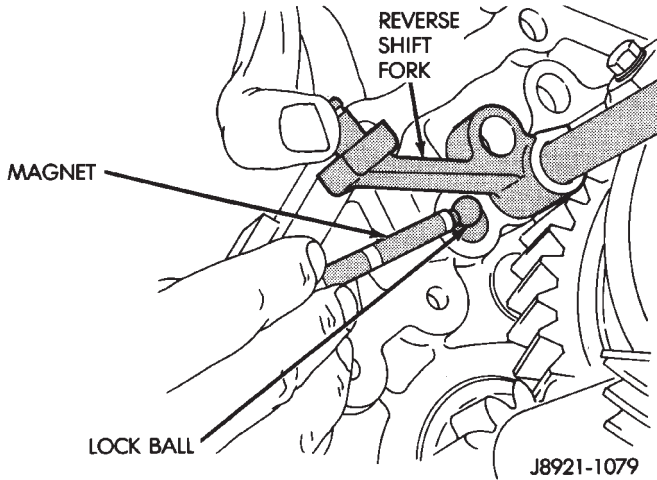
Fifth Gear Shift Rail Lock Ball Removal
